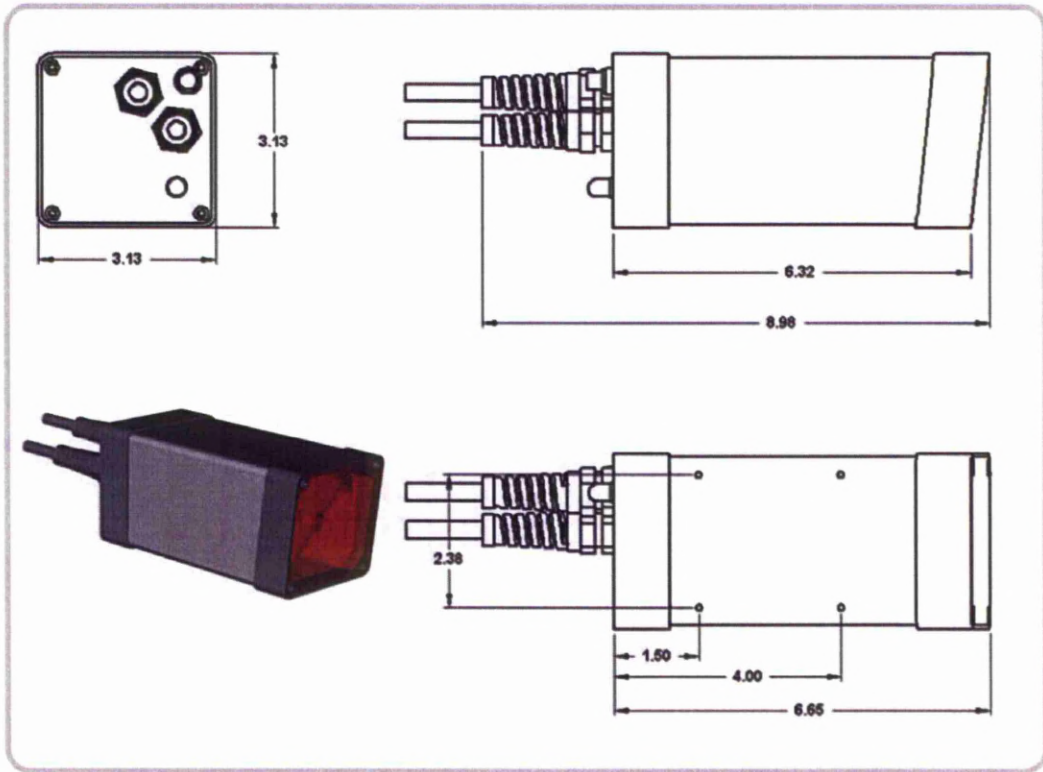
Mechanical Dimension for Acuity AR4000-LV in inches [75].
